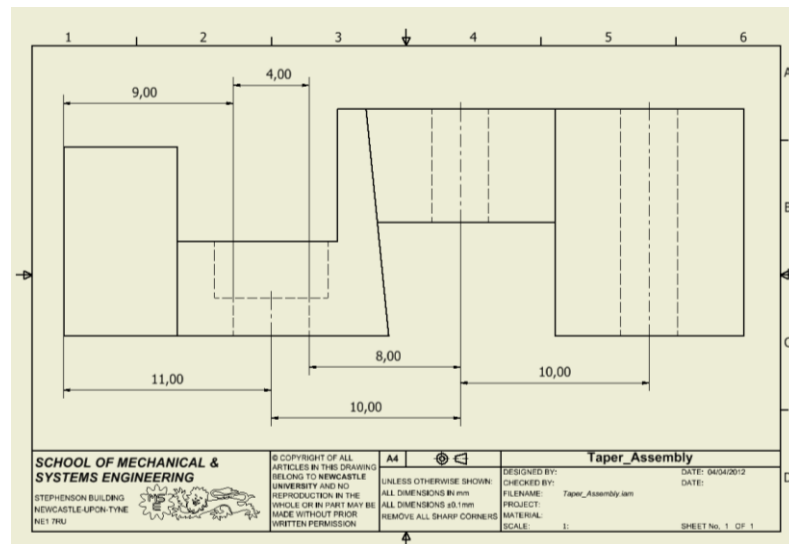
Engineering assembly drawing of electrode location mechanism, as fabricated.
